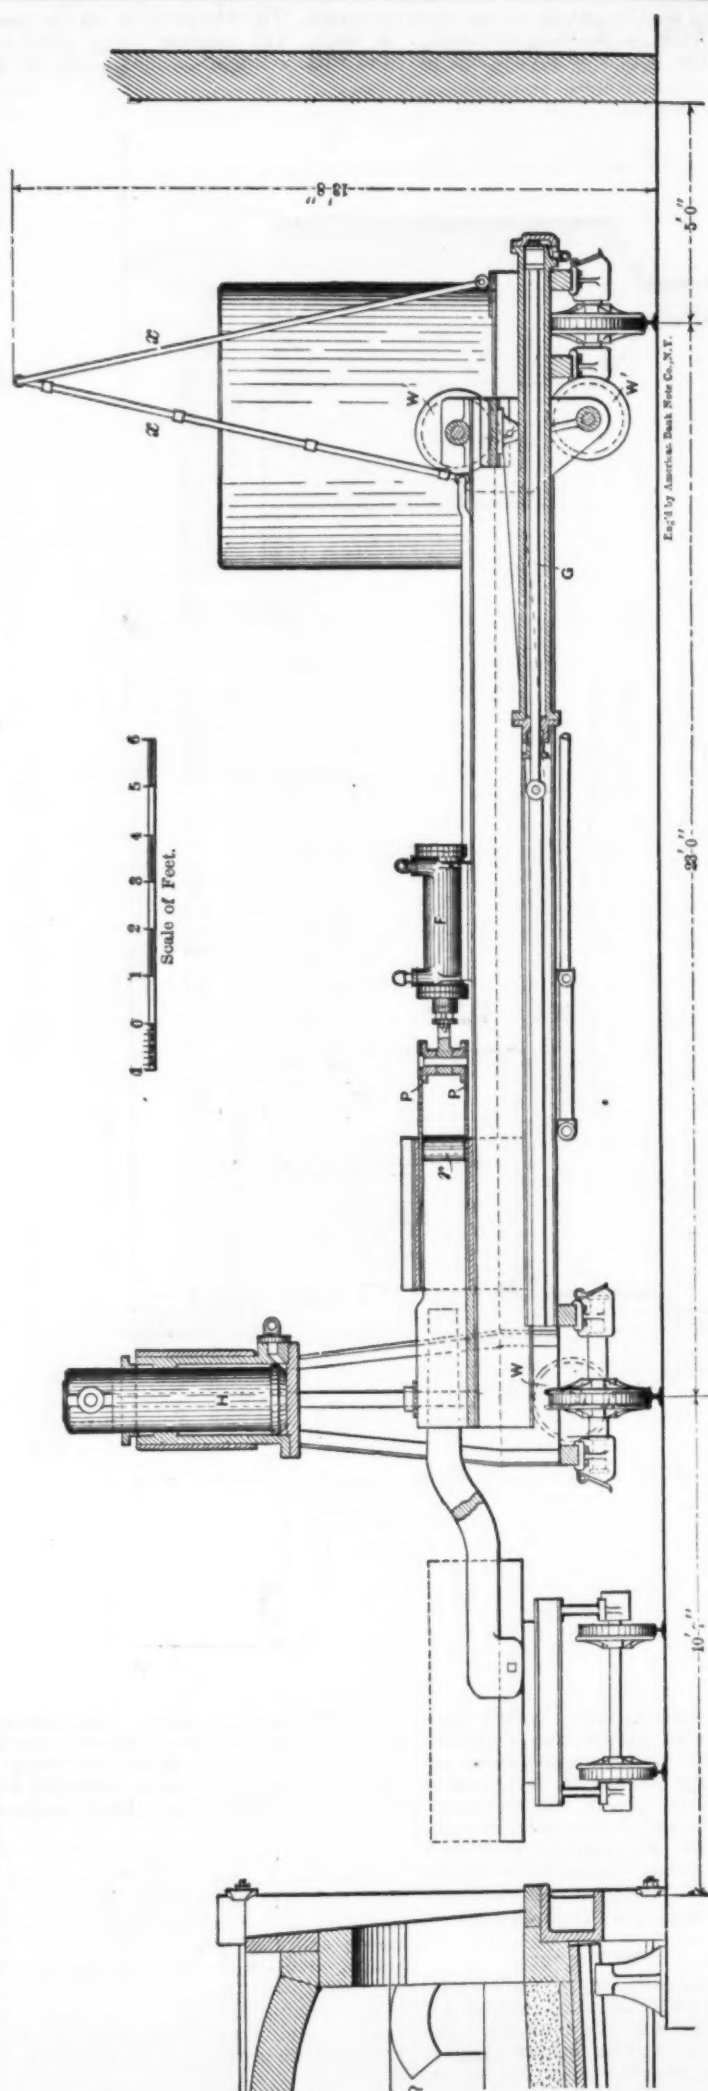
Longitudinal Vertical Section and Cross Section of Furnace and Car.
